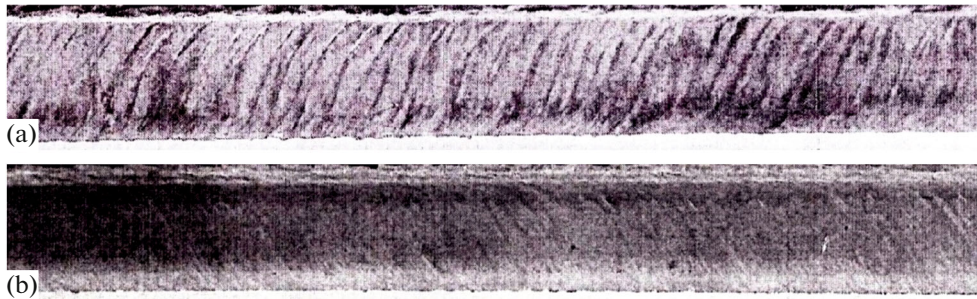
Appearance of cutting surface depending on inclination angle of plasma torch: (a) straight cut (sample 2.1); (b) oblique cut (sample 2.2).
